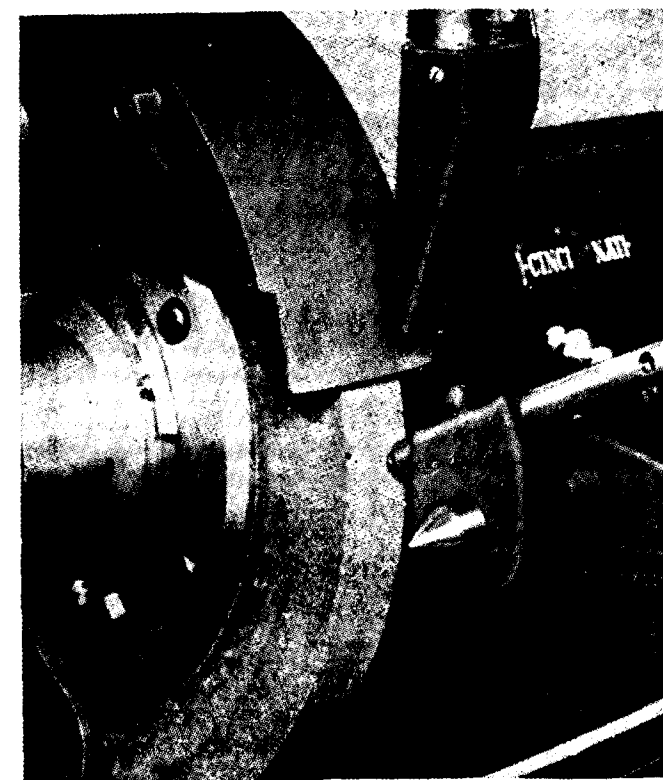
Standard wheel truing device on a Centre-type grinding Machine.
